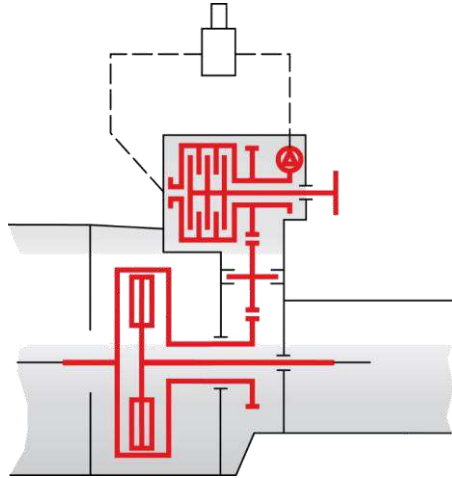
Operation of the control unit during drive from the engine (NMV221)
